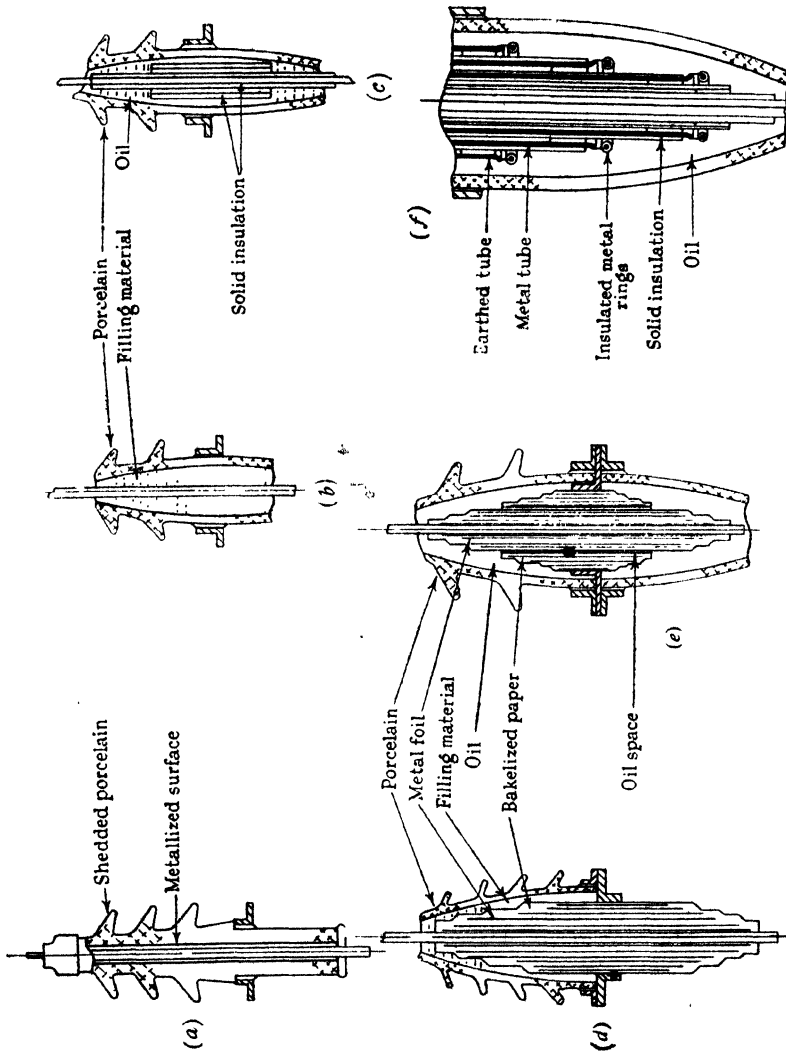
CONSTRUCTION OF TERMINAL BUSHINGS
